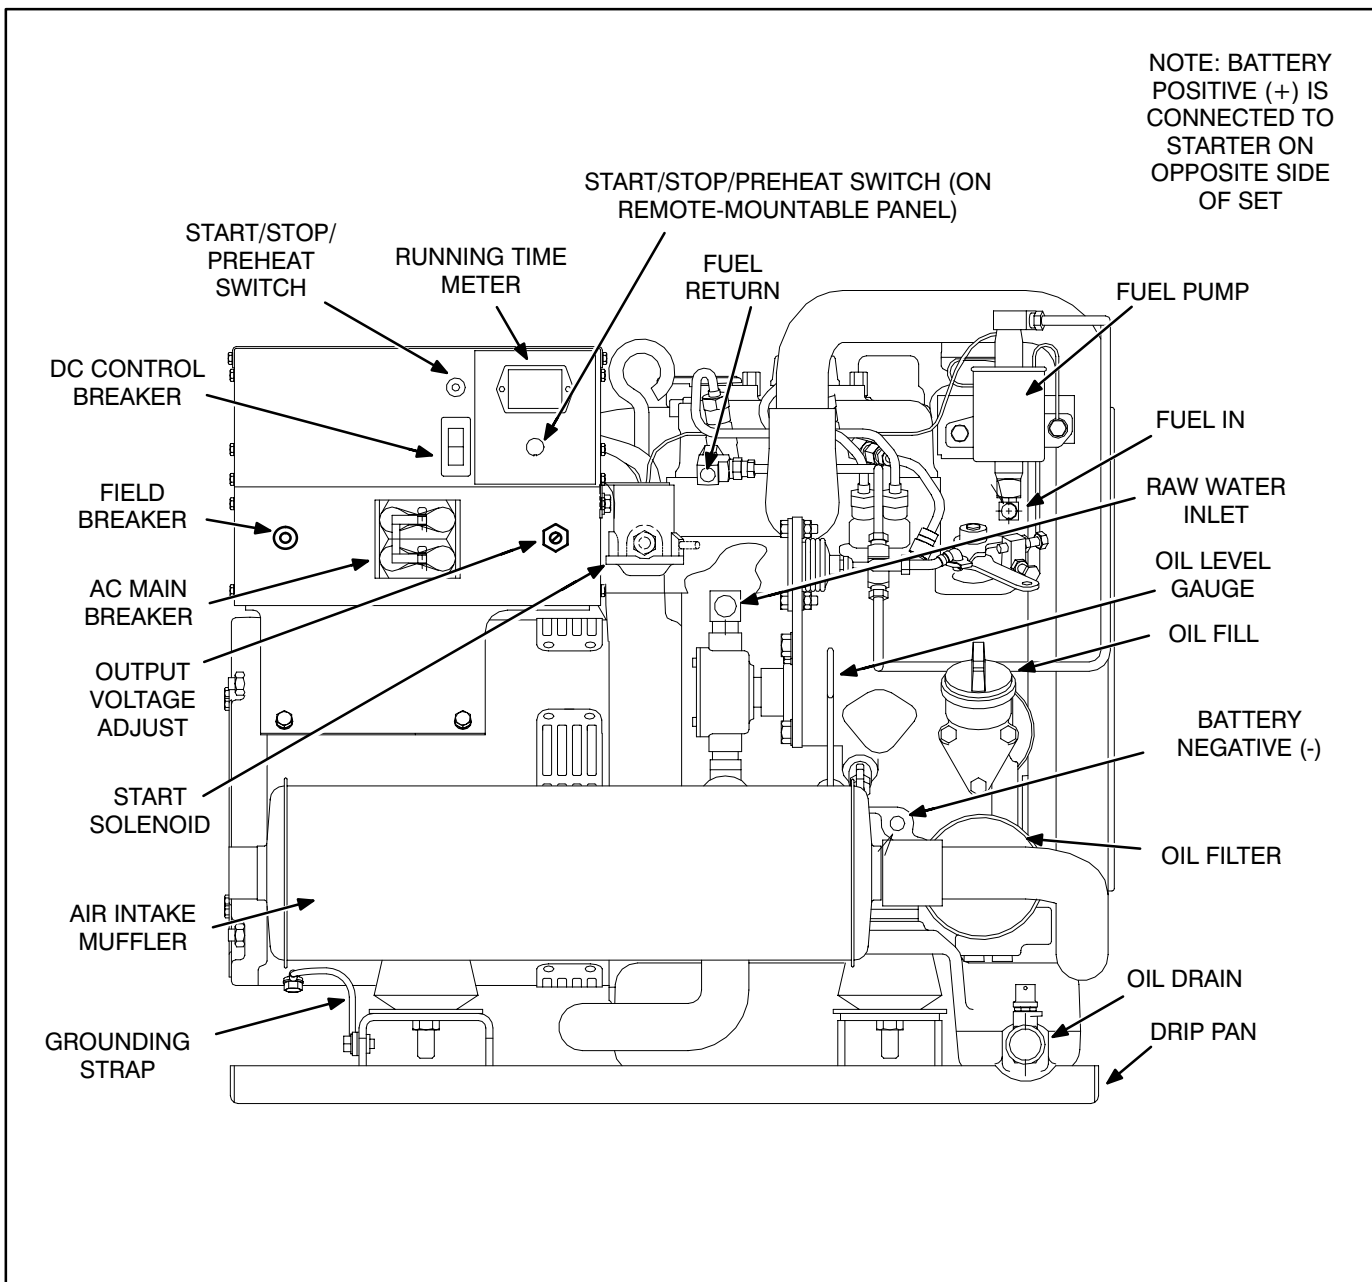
GENERATOR SET COMPONENT LOCATIONS (MDKUB SHOWN WITHOUT HOUSING)
